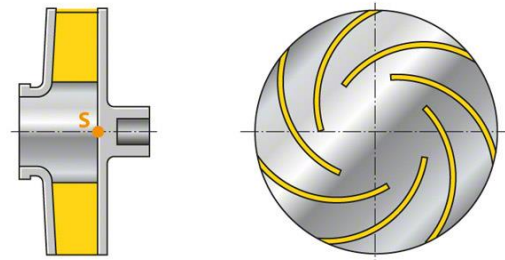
Impeller: Radial impeller with purely radial vanes, stagnation point S (shown with front shroud removed)
